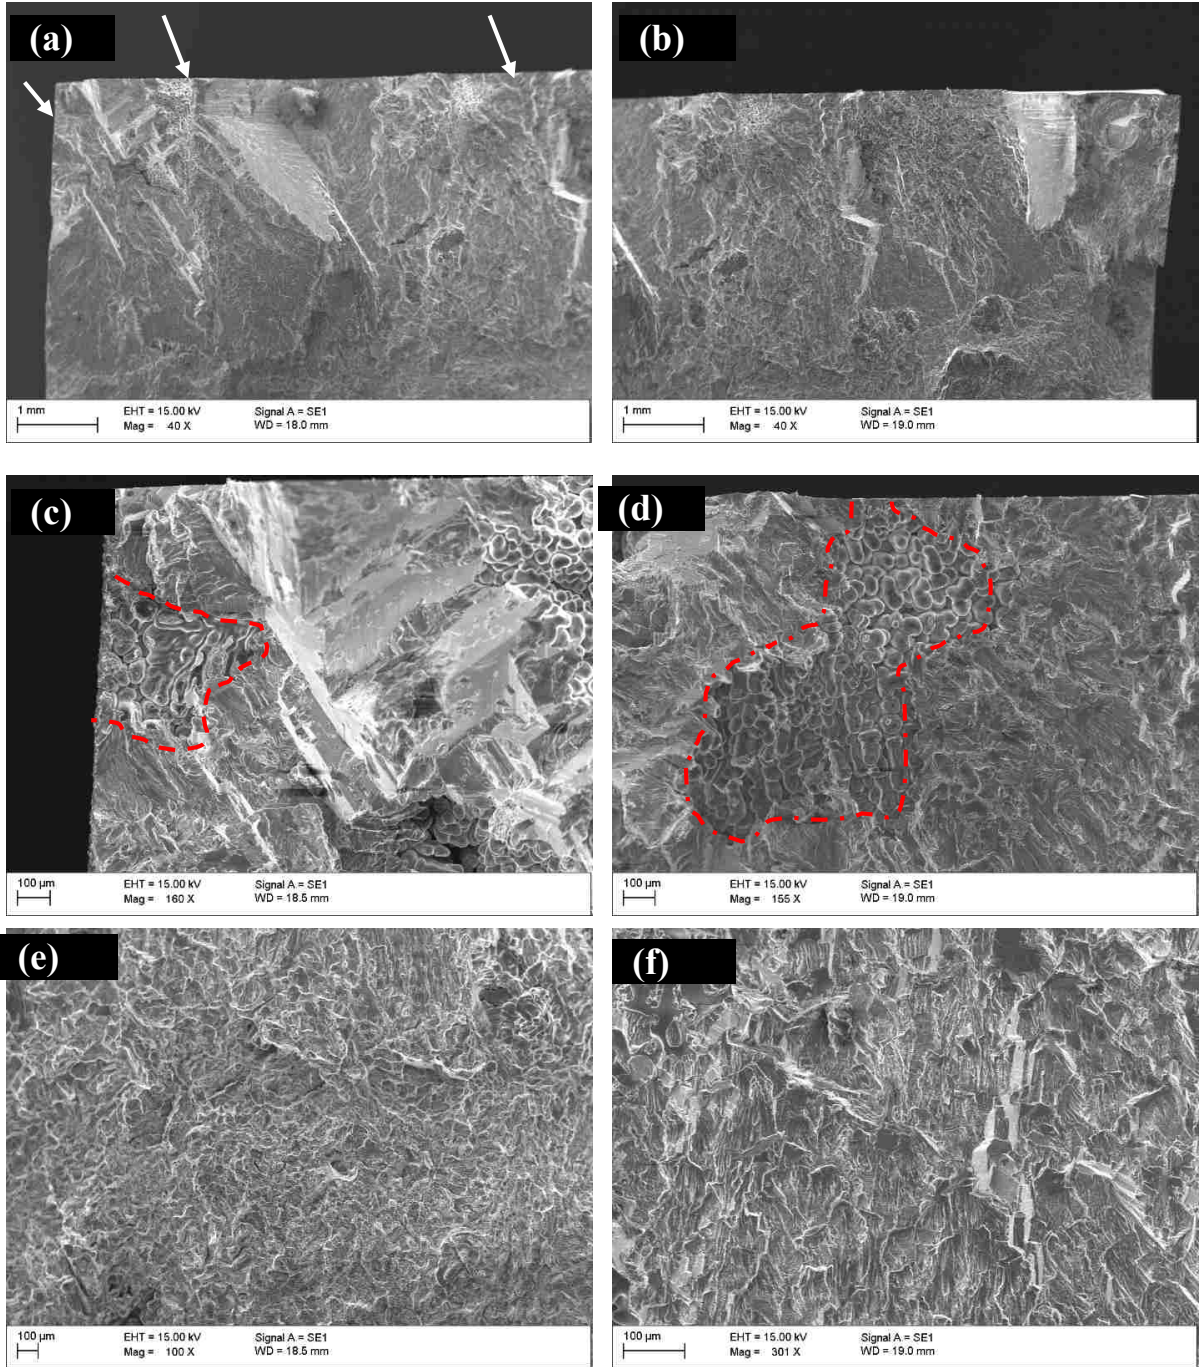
SEM micrographs showing: (a) low magnification of fracture surface; (b) the other portion of fracture surface of sample No. 2mm-10, 110% σ_y ; (c), and (d) pores nucleated cracks; (e) Crack propagation zone; and (f) final failure.
